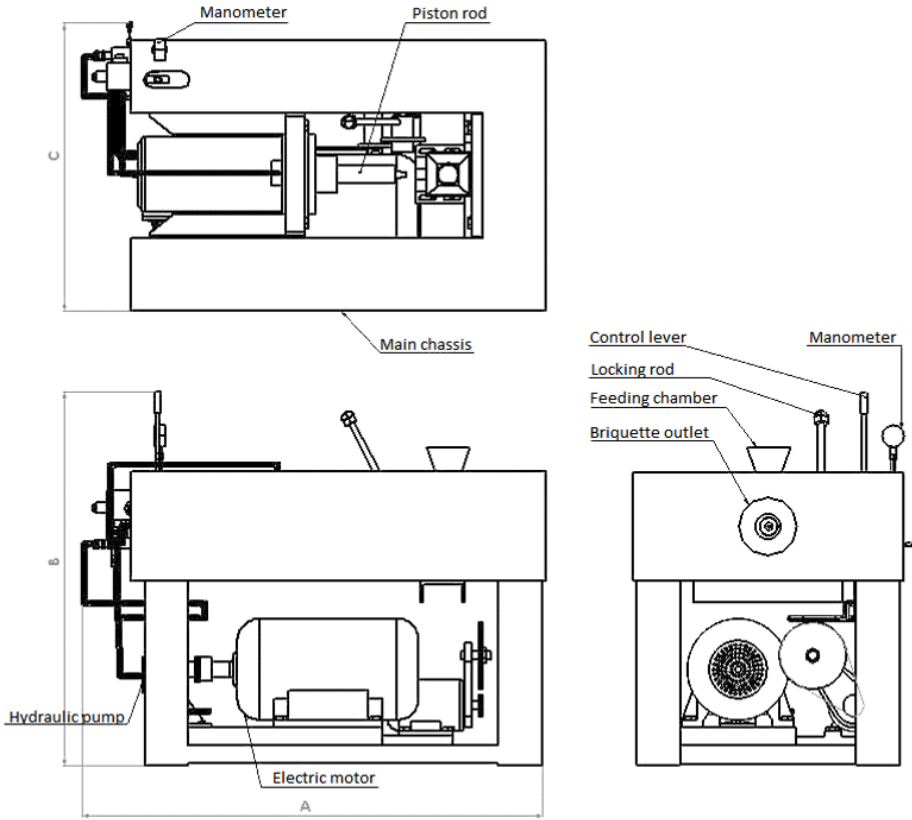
Hydraulic briquetting machine (A: 1280 mm; B: 1155 mm; C: 740 mm)
